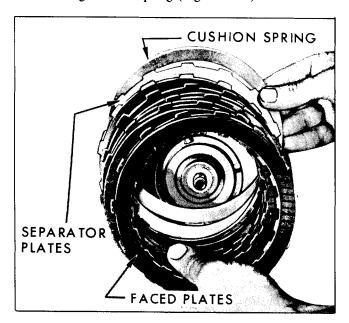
G-107 Removing or Installing Forward Clutch Plates
